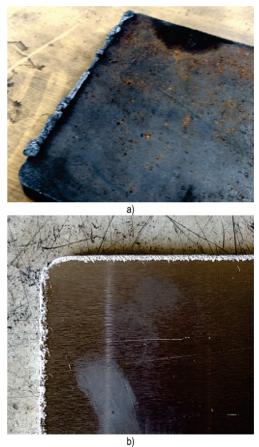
Common issues during machining process using suboptimal settings: a) The accumulation of slag on the underside of the cut specimen due to insufficient cutting speed, b) Slag on the upper side of the workpiece due to excessive cutting speed.
